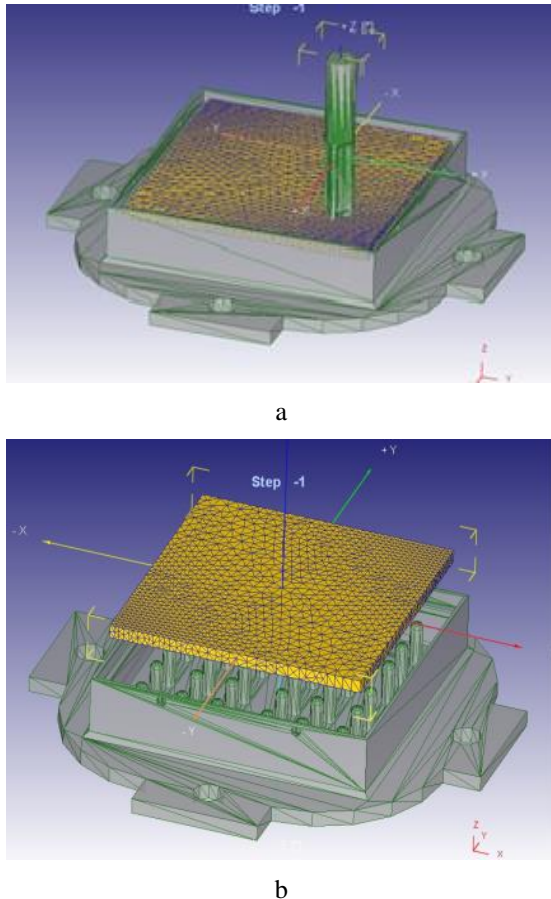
Work piece in fixture: a) positioning of work piece on the fixture; b) combined positioning- fixture, specimen and milling cutter model
